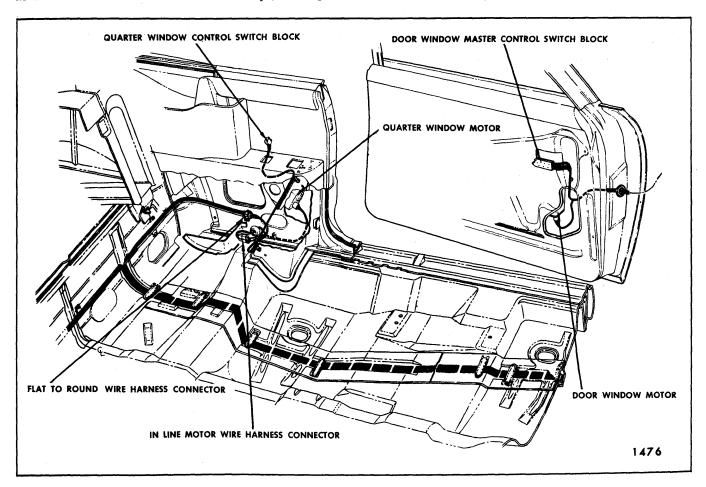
Left Side Power Window Wiring - "A" 67 Styles
